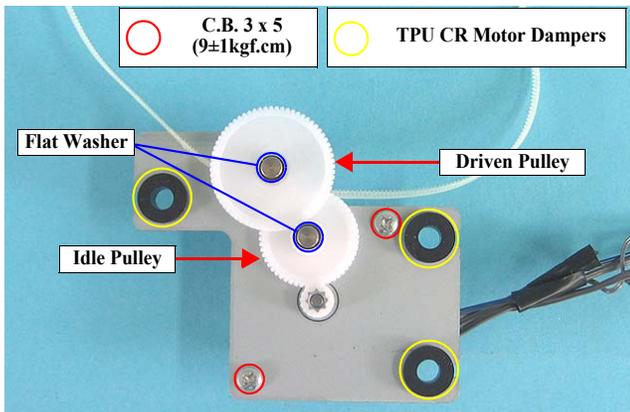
Removing the TPU CR Motor Dampers and TPU CR Motor
